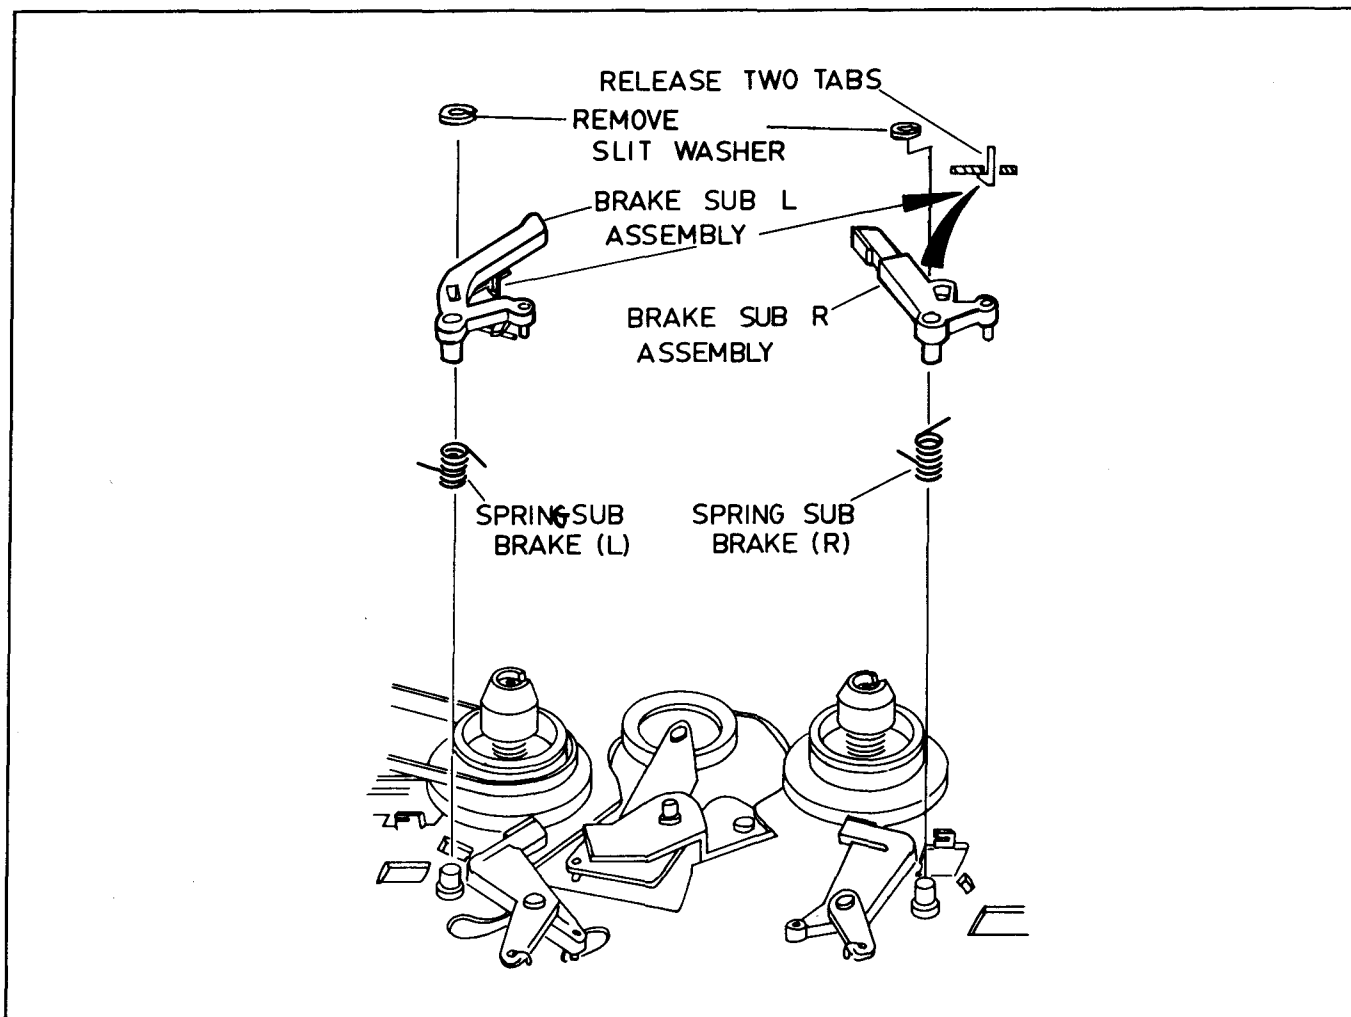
Brake Sub (R) Assembly and Brake Sub (L) Assembly Removal
